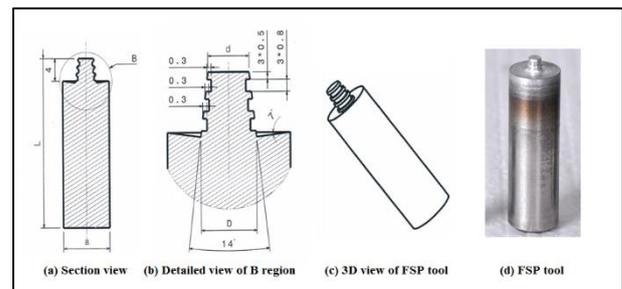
Design and manufacturing of a sample of the FSP tool.
